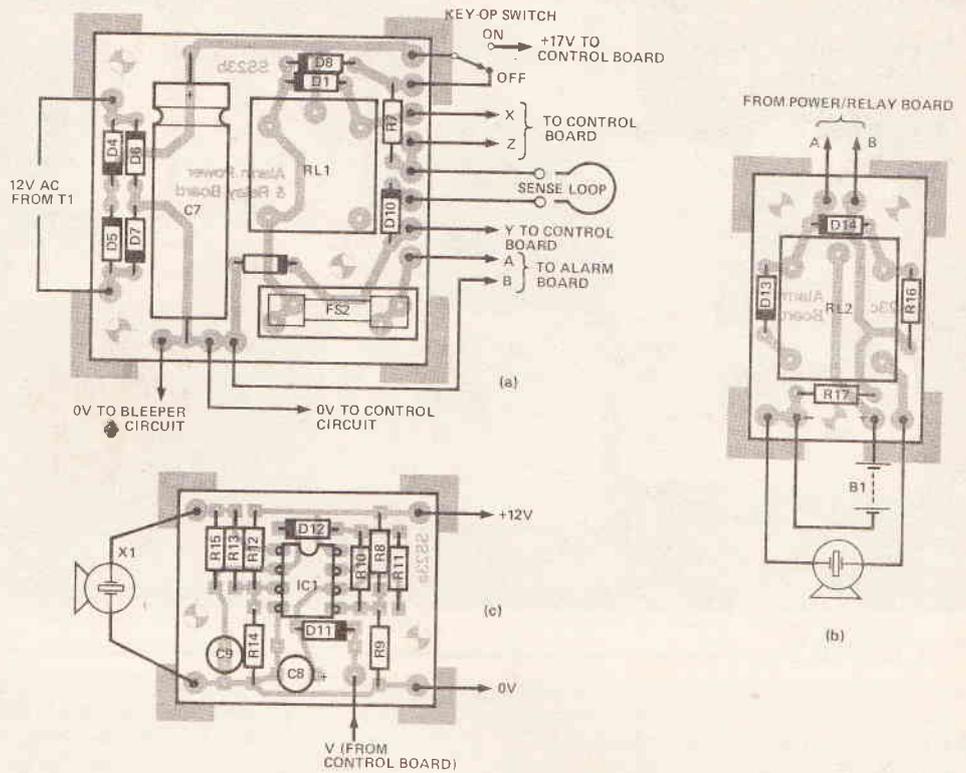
Component overlays for the expanded Burglar Buster. (a) The power and relay board. (b) The bleeper board. (c) The alarm board
